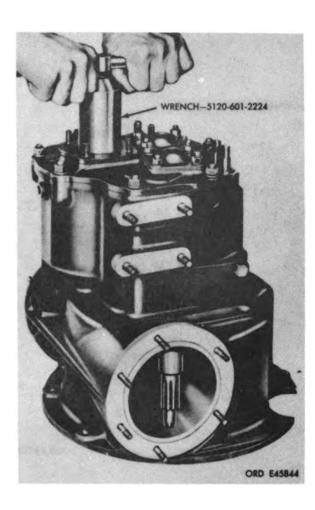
Removing or installing hex nut using socket wrench 5120-601-2324.
